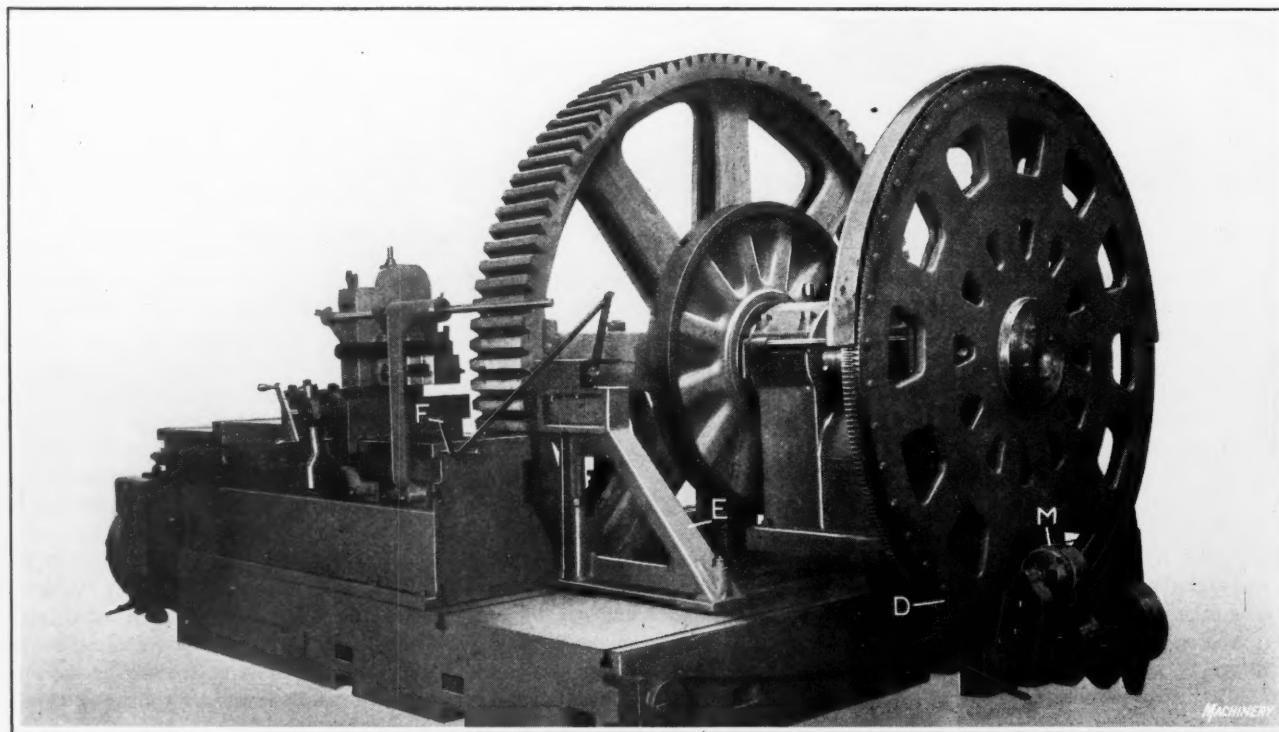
View of a Spur Gear Planer showing the Indexing Mechanism and Large Dividing Wheel
